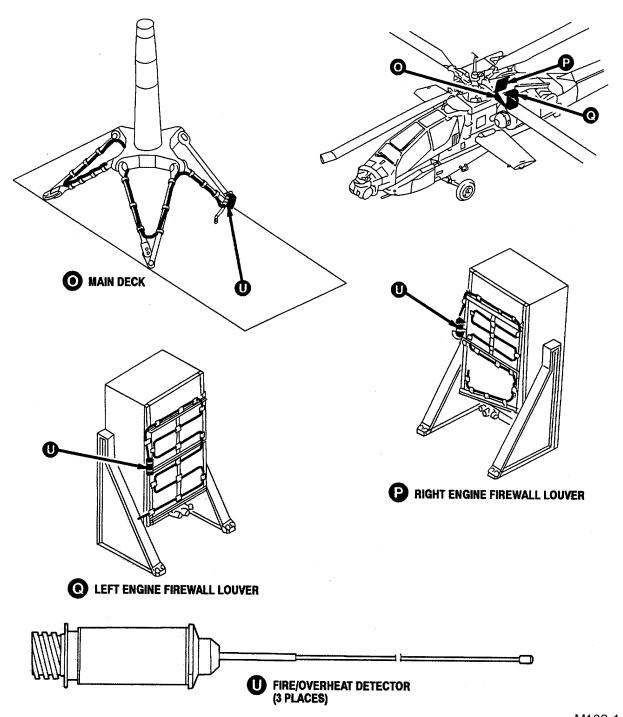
Fire Detection Subsystem Component Location (Sheet 4 of 4)
